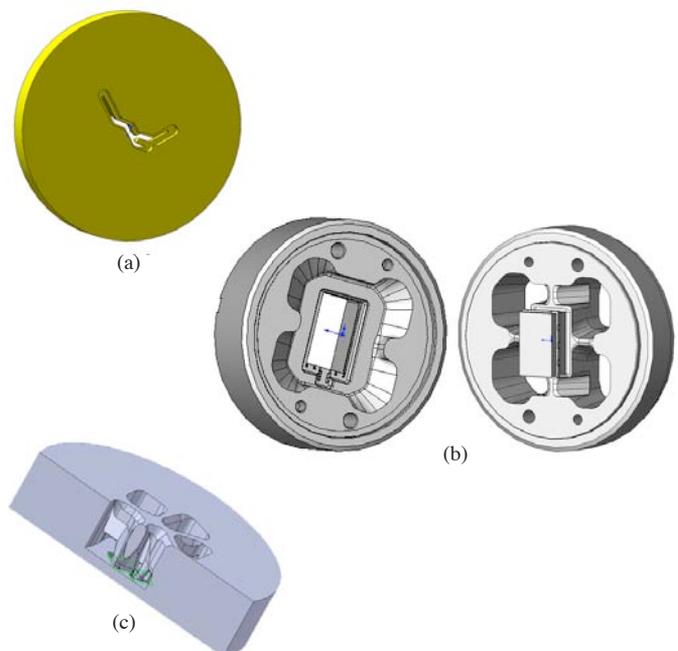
Different types of dies for extrusion of aluminum profiles: (a) flat die for solid profiles; (b) mandrel die for hollow profiles; (c) die with stepped chamber of bearing.
